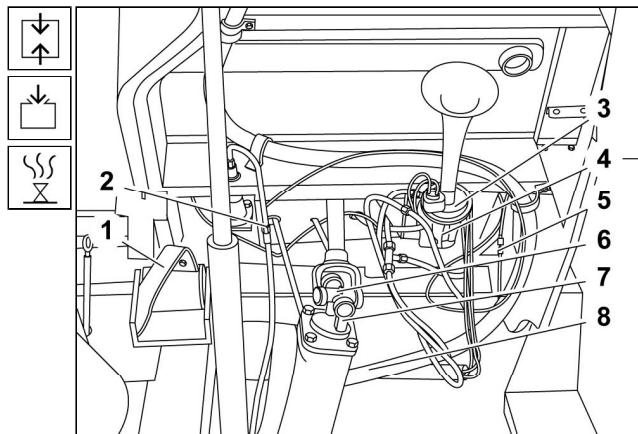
Grounding cable of cabin, crosshead pin, air manifold, Bowden cable - installation
